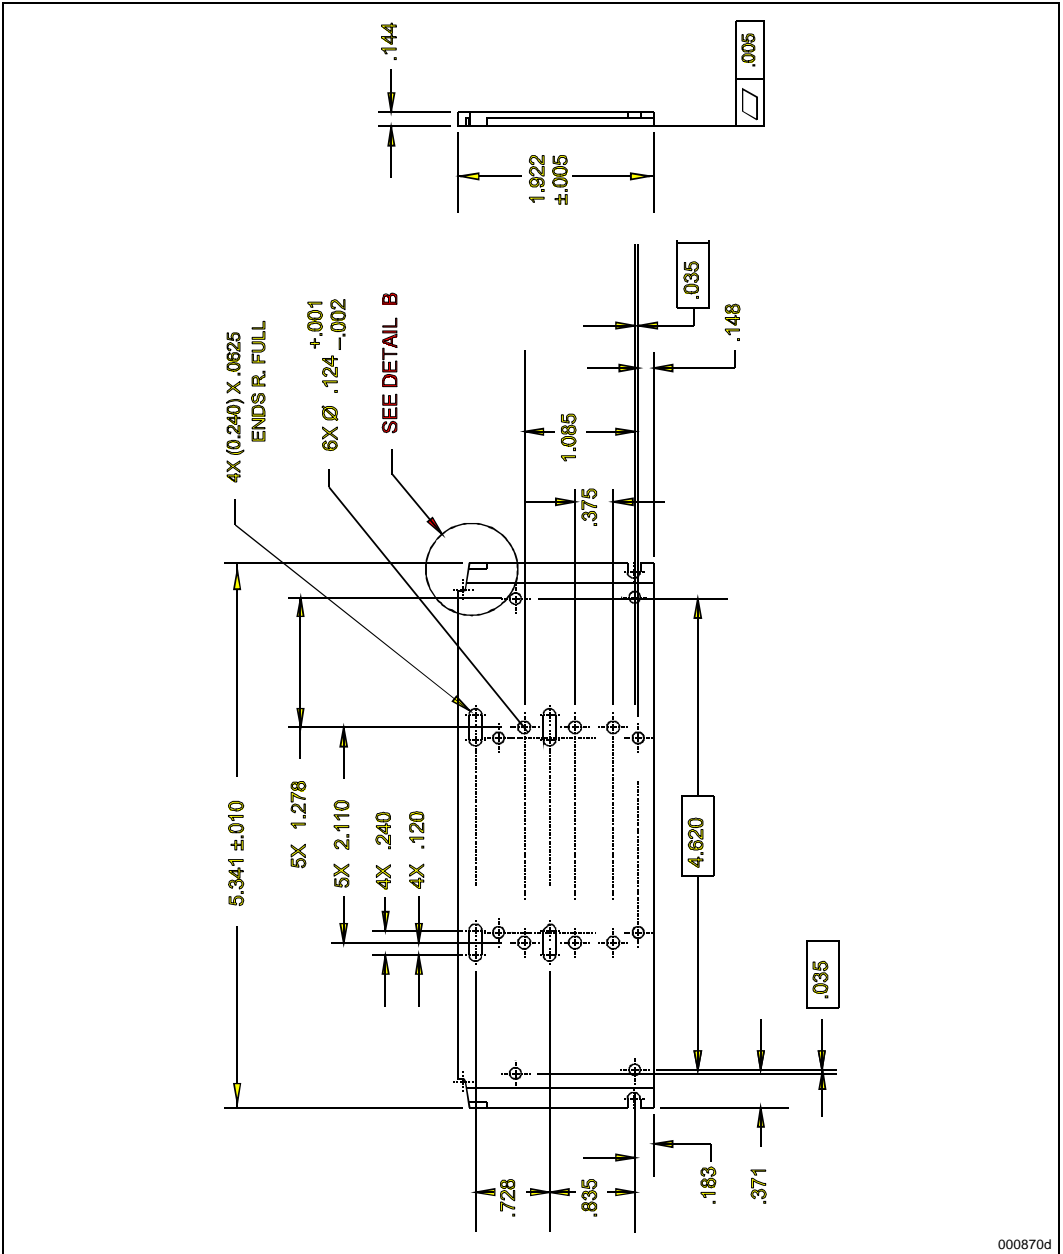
Thermal Plate Mechanical Dimensions (1 of 2)
